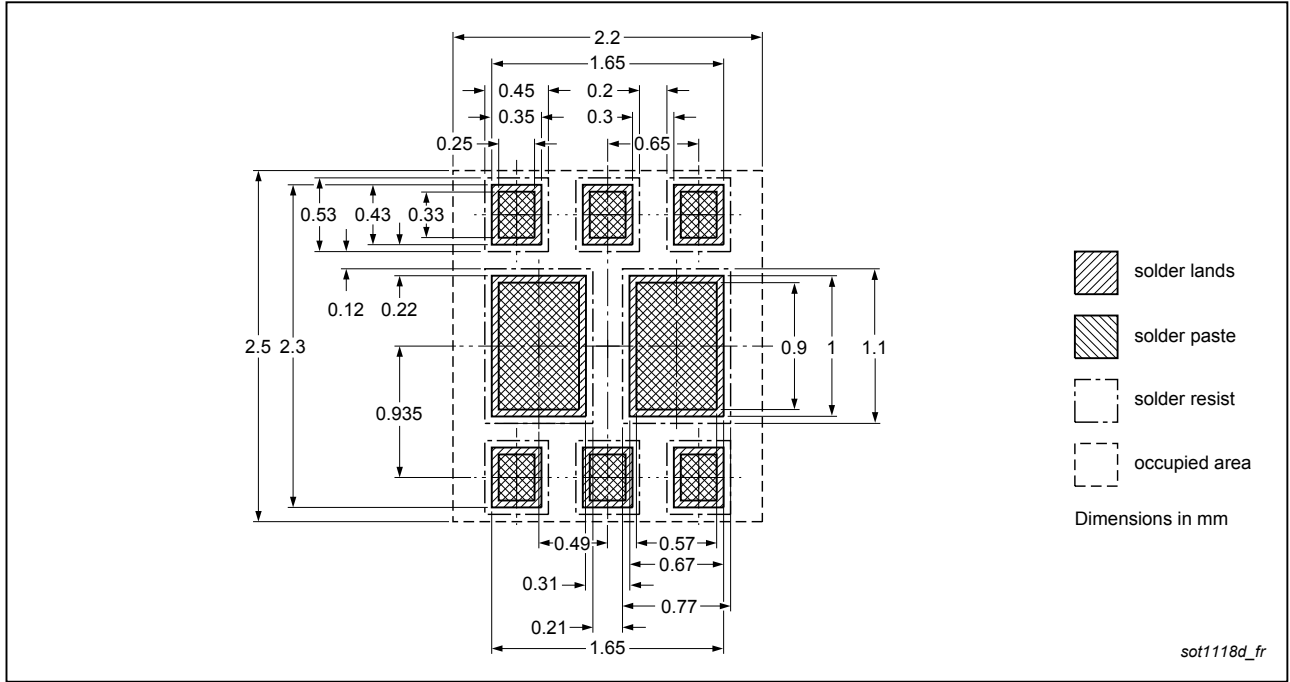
Reflow soldering footprint for DFN2020D-6 (SOT1118D)
